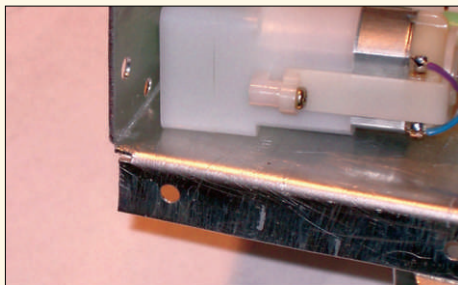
Two screws have to be reused for mounting the motor. First, they have to be removed.
